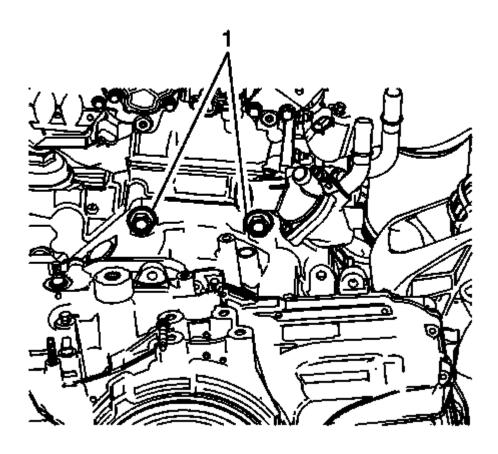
View of Timing Chain Oil Nozzle Courtesy of GENERAL MOTORS COMPANY
